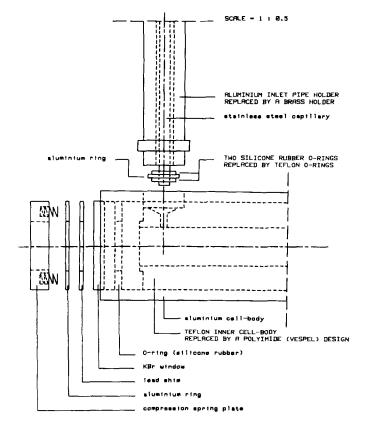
A (partly) exploded view of the inner assembly of the heated gas cell.
